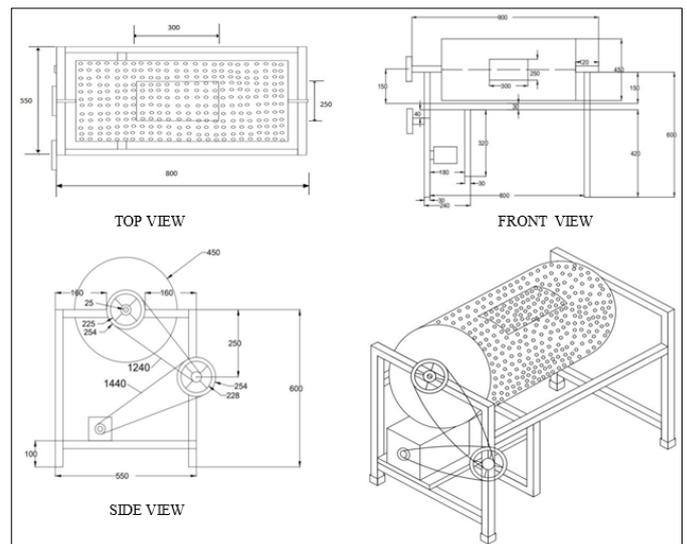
Schematic view of turmeric polisher (All dimensions are in mm)
